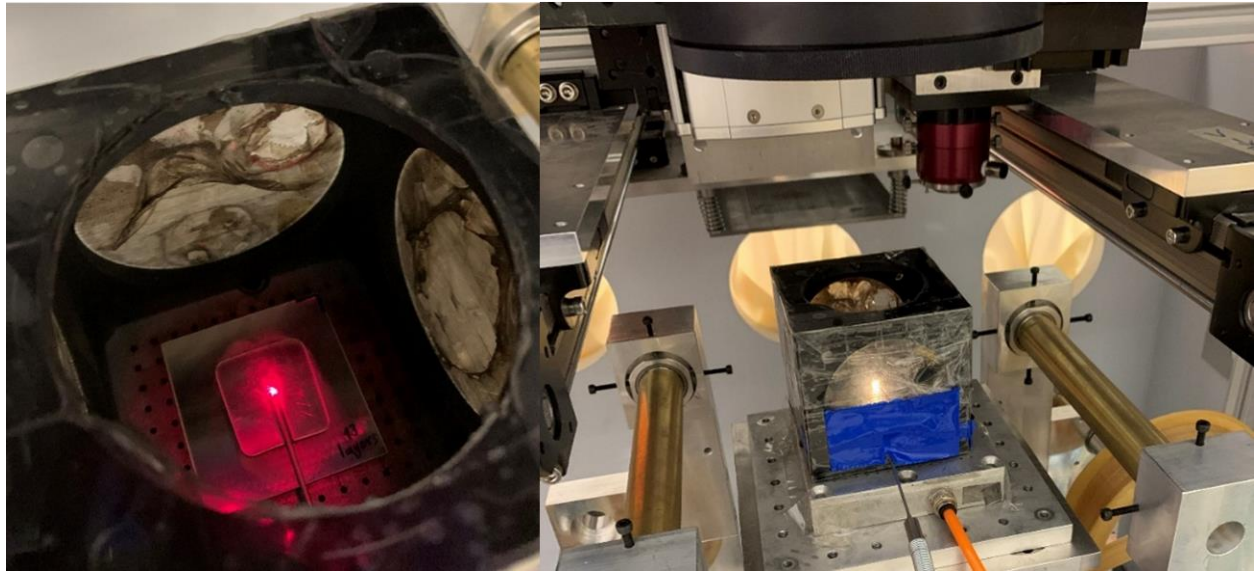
Laser foil printing of embedded WPTC: argon chamber assembly from top (left) and during spot welding (right).
